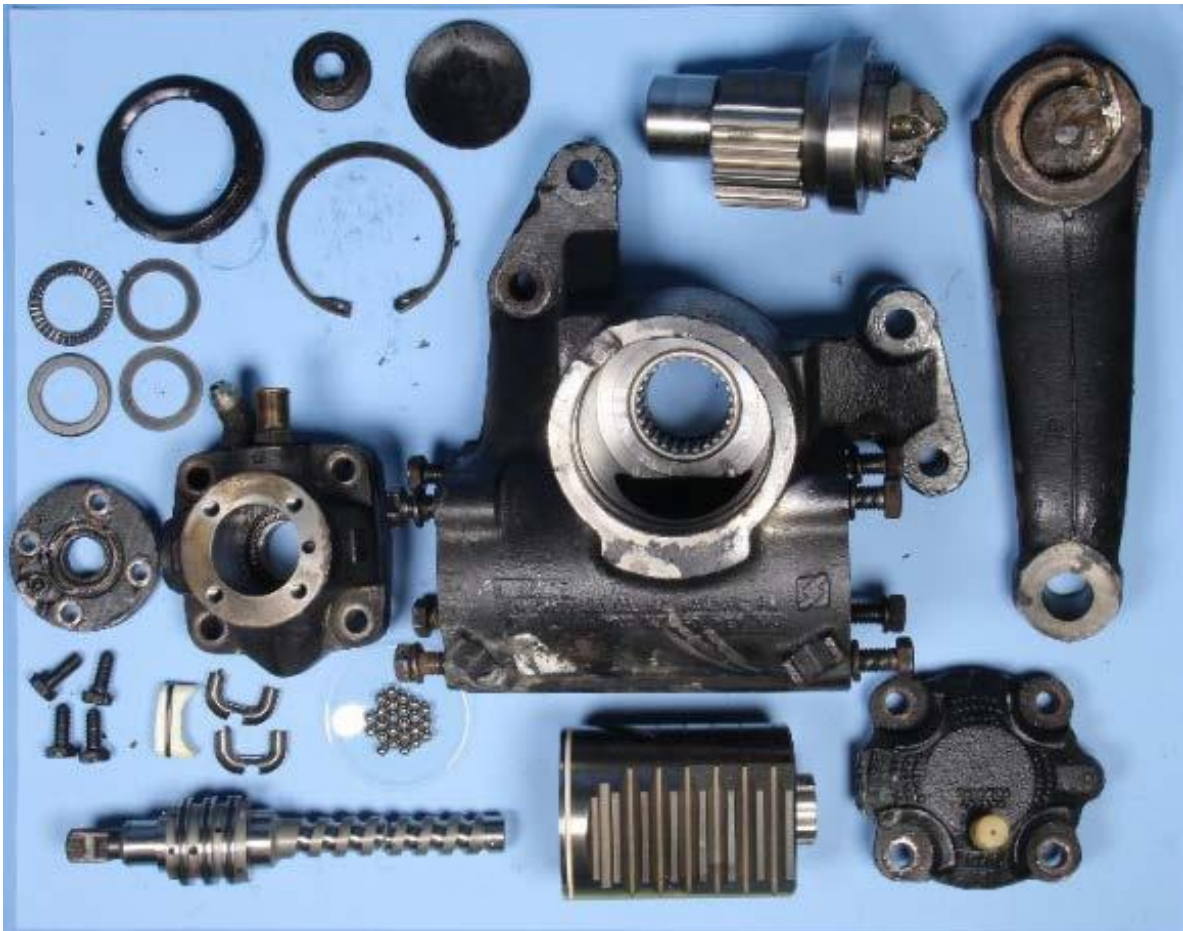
Disassembled Steering Gearbox of the 2015 IC School Bus
